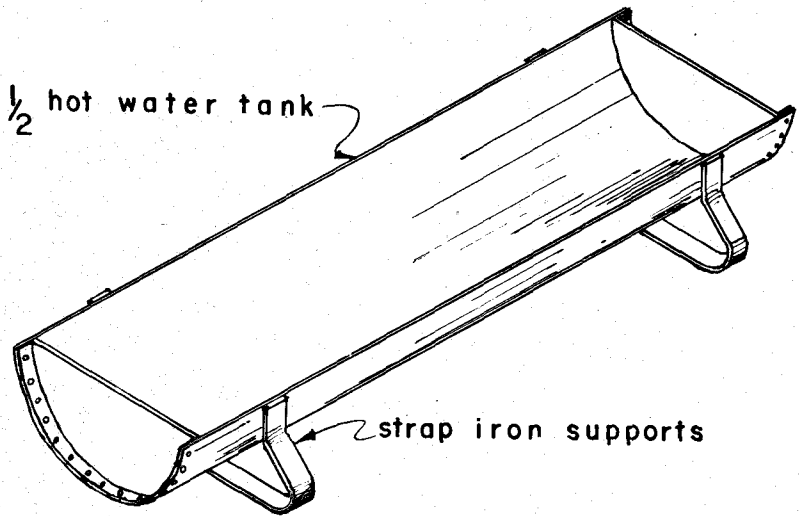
Discarded hot water tanks can be made into cheap and convenient water or feed troughs.
